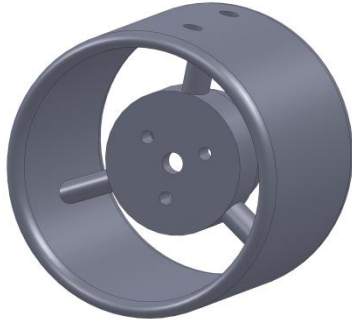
Front view of cowling, the first setup machined the 3D surfaces and features you can see here. Square stock was used so the machine could be zeroed for the back setup.
